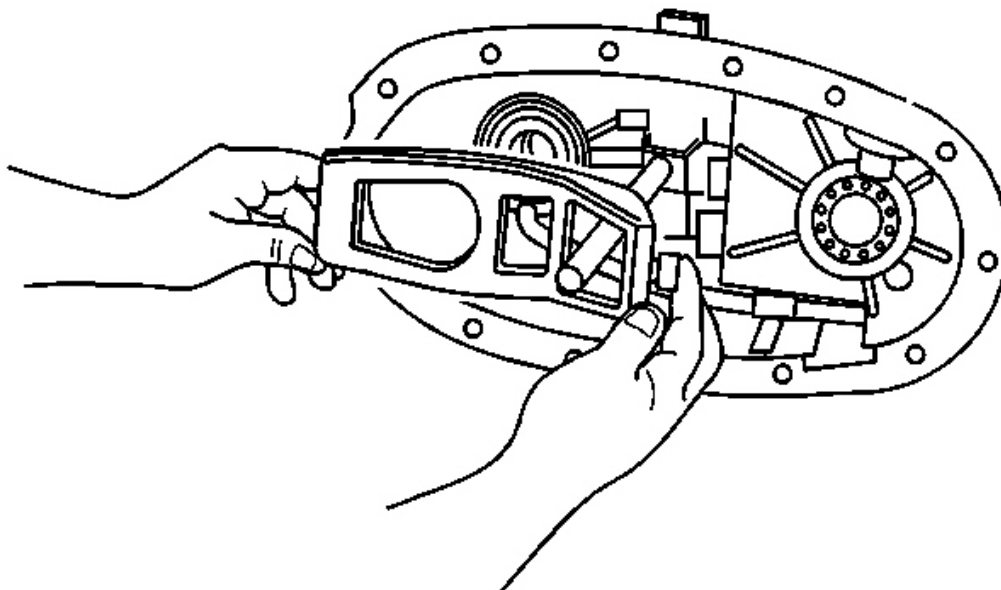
Installing The Clutch Apply Plate Retaining Ring
